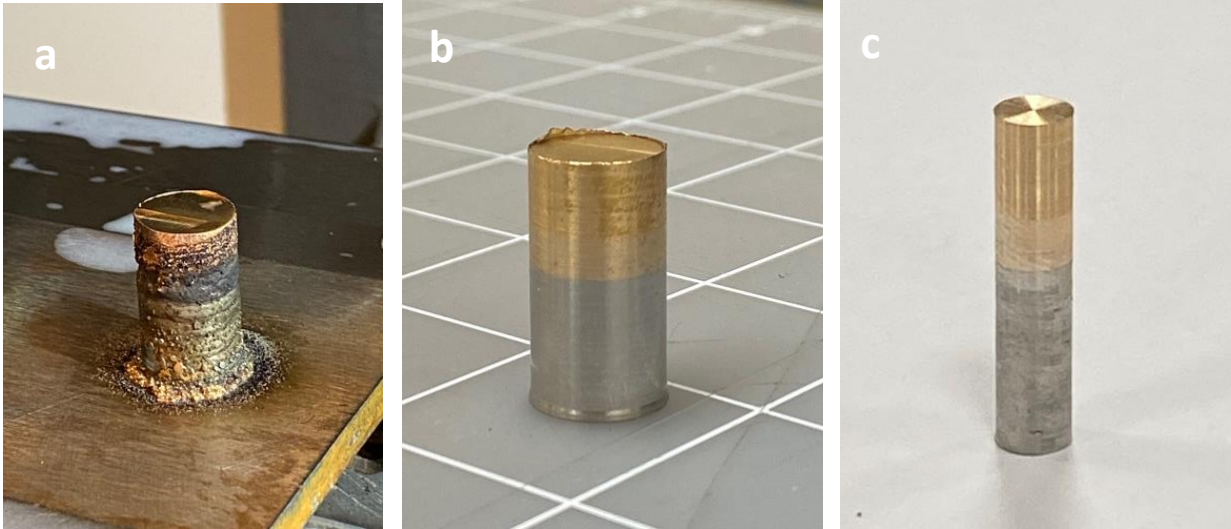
Cylindrical specimen for compressive strength testing through the steps: (a) fabricated, pre-machining, (b) post-machining. (c) post-turning.
